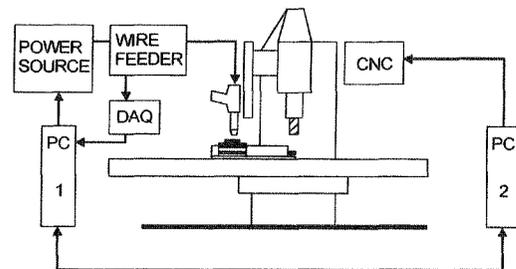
2½ axis CNC hybrid rapid prototyping machine
